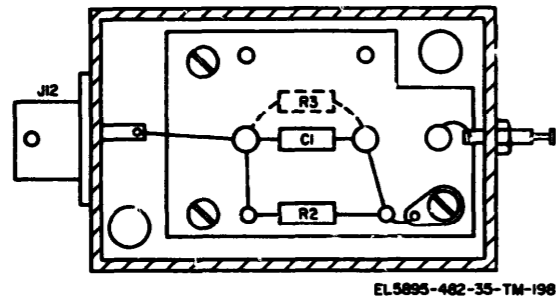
9151 linear power amplifier grid attenuator assembly A3, parts location
